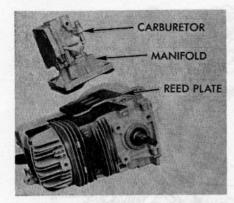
View of carburetor and manifold removed from Model MC-8 engine showing reed plate. Refer to Fig. MC19 for exploded view of reed plate assembly.
